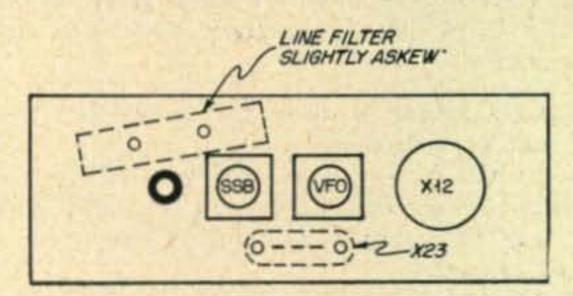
Mounting details inside the skirt of the extra co-ax socket input on the VIKING II.
